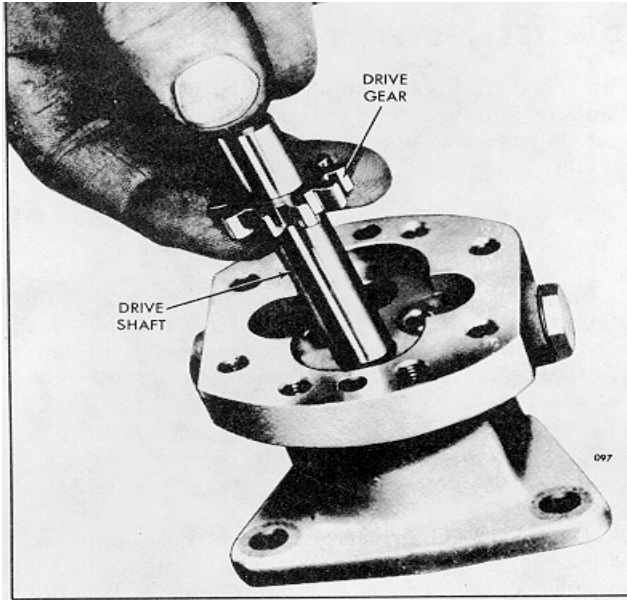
Installing Fuel Pump Drive Shaft and Gear Assembly
